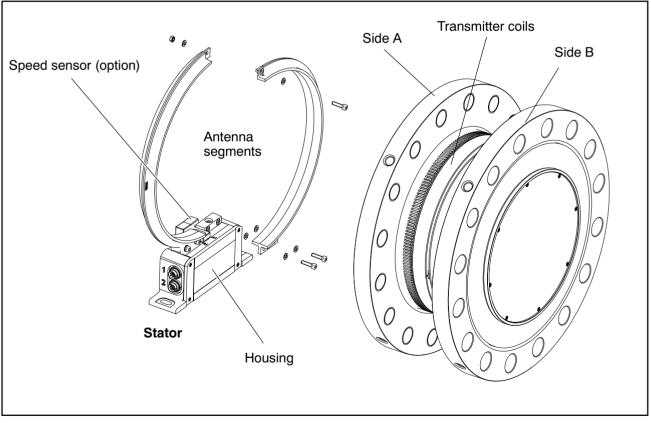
Mechanical construction, exploded view (rotating version)
